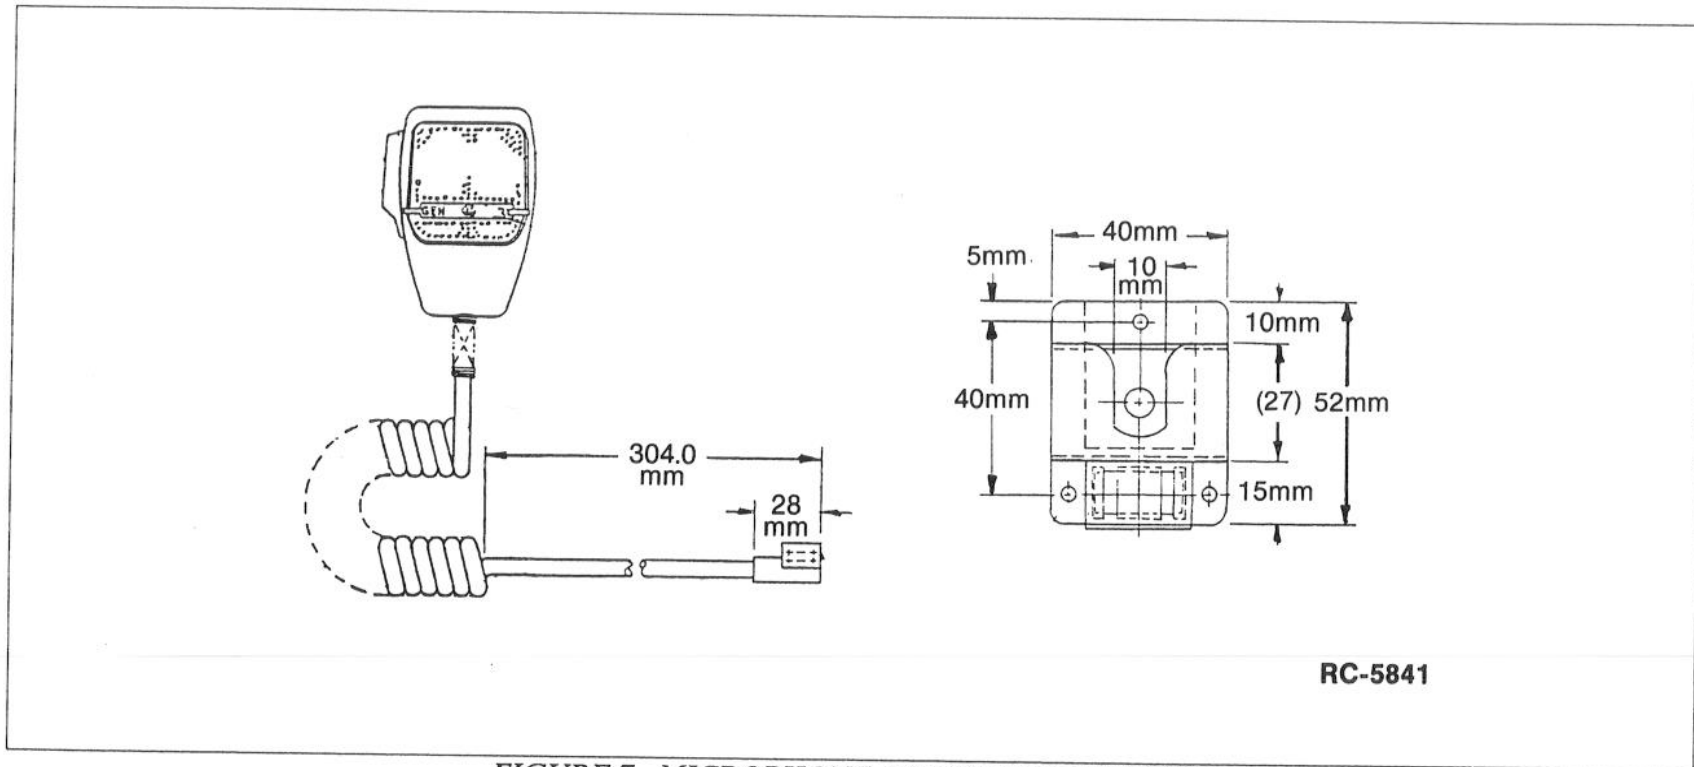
MICROPHONE BRACKET MOUNTING
